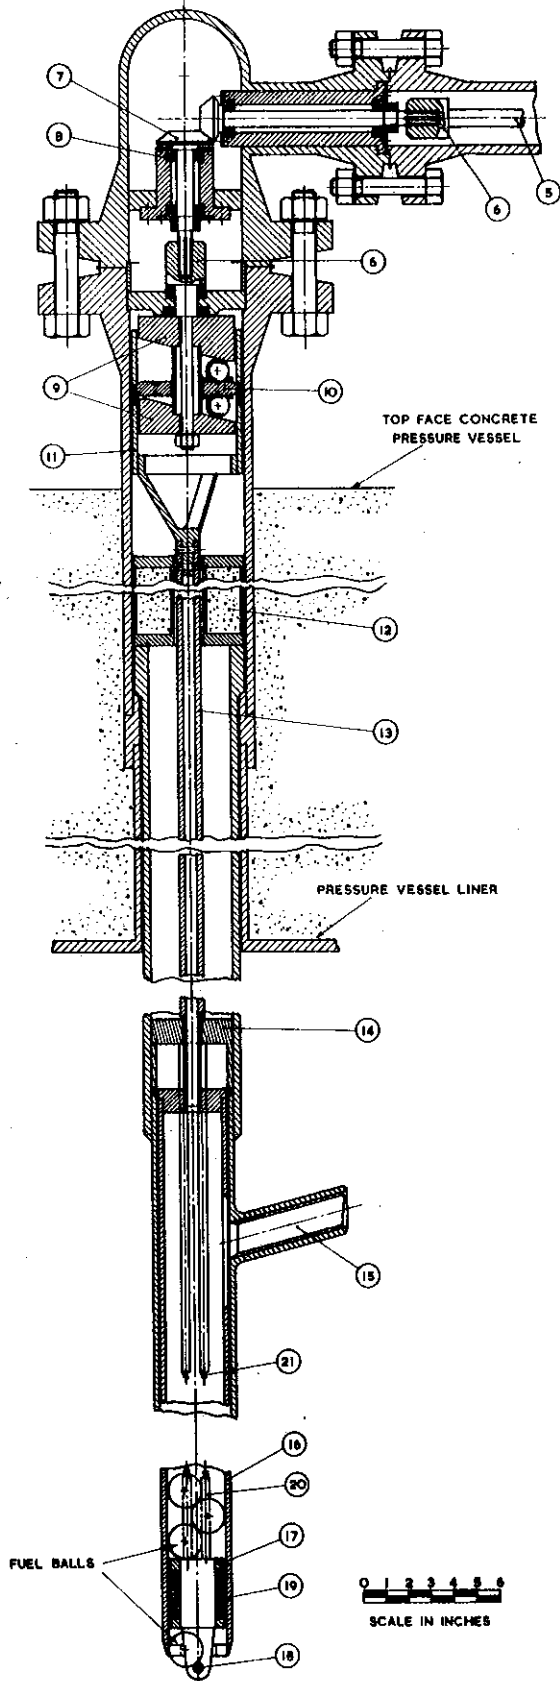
FUEL ELEMENT INLET AND PREHEATING MECHANISM FOR A P.B.R.
